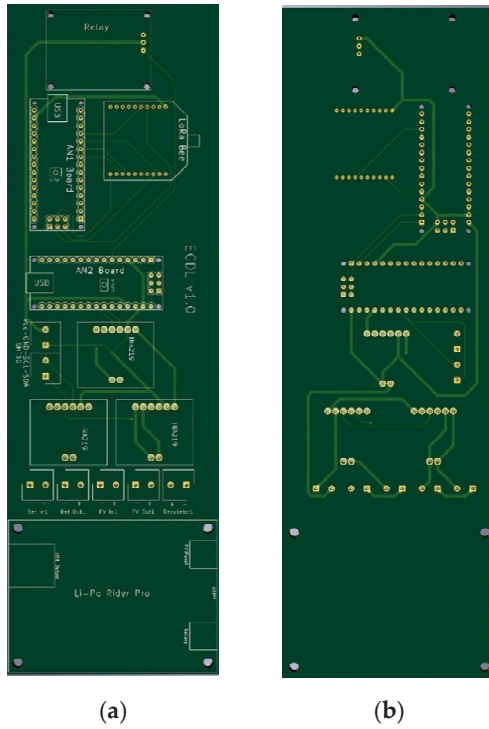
PCB of the ECDL with battery power supply: (a) front side and (b) back side.
